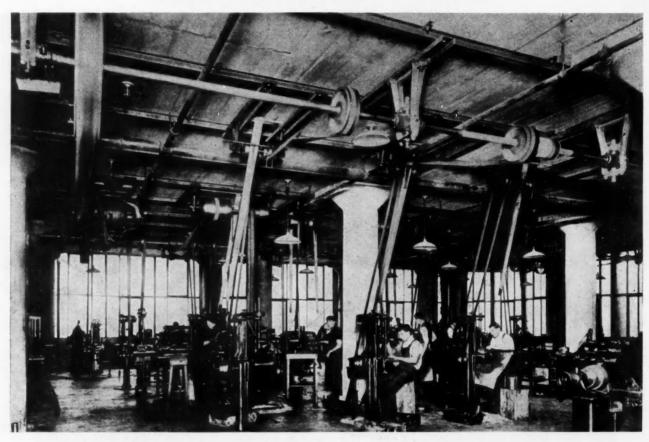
Interior of Flat Slab Building, Showing Ease of Attachment of Shafting and Piping to Ceiling.
